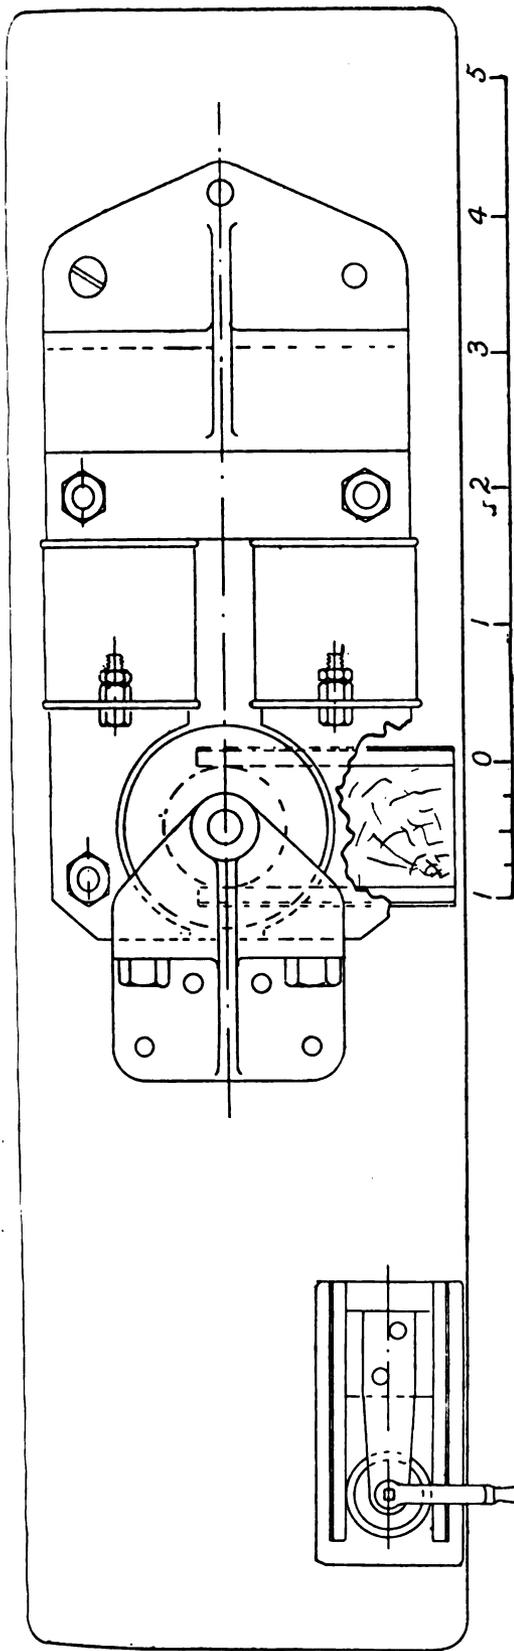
PLAN SHOWING ARRANGEMENT OF MOTOR AND REVERSER.
